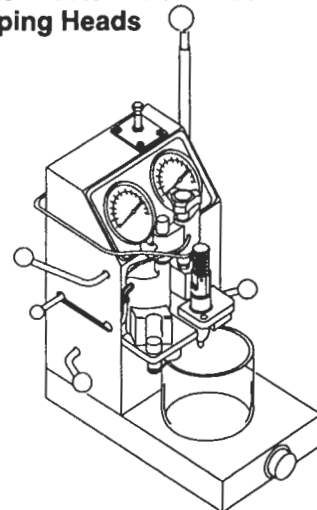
Injector Installed in Tester J 23010-A with Clamping Head
